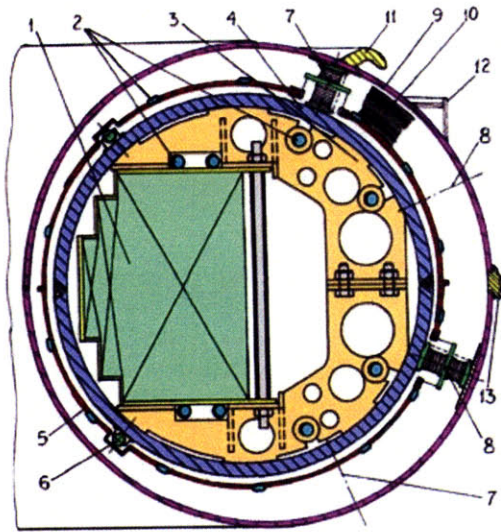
F-Coil cross-section. 1—magnet; 2—heat exchanger; 3—gusset; 4—helium vessel; 5—radiation shield; 6—glass ball shield support; 7—vacuum shell and shield support; 8—side bumper; 9—vacuum shell; 10—MLI thermal insulation; 11—lifting disk; 12—laser beam control structure; 13—vacuum shell ring. From Zhukovsky *et al.* “Design and Fabrication of the Cryostat for the Floating Coil of the Levitated Dipole Experiment” (2000).
